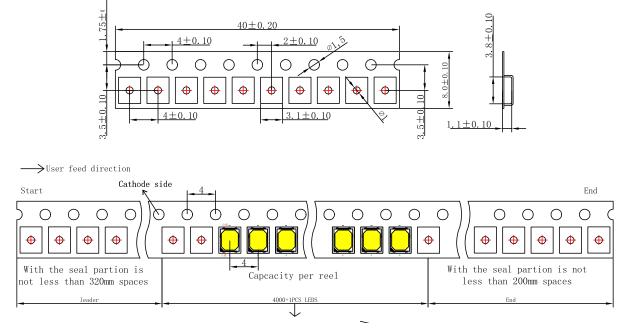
Pocket Tape dimensions for LUXEON 2835 Color Line.
